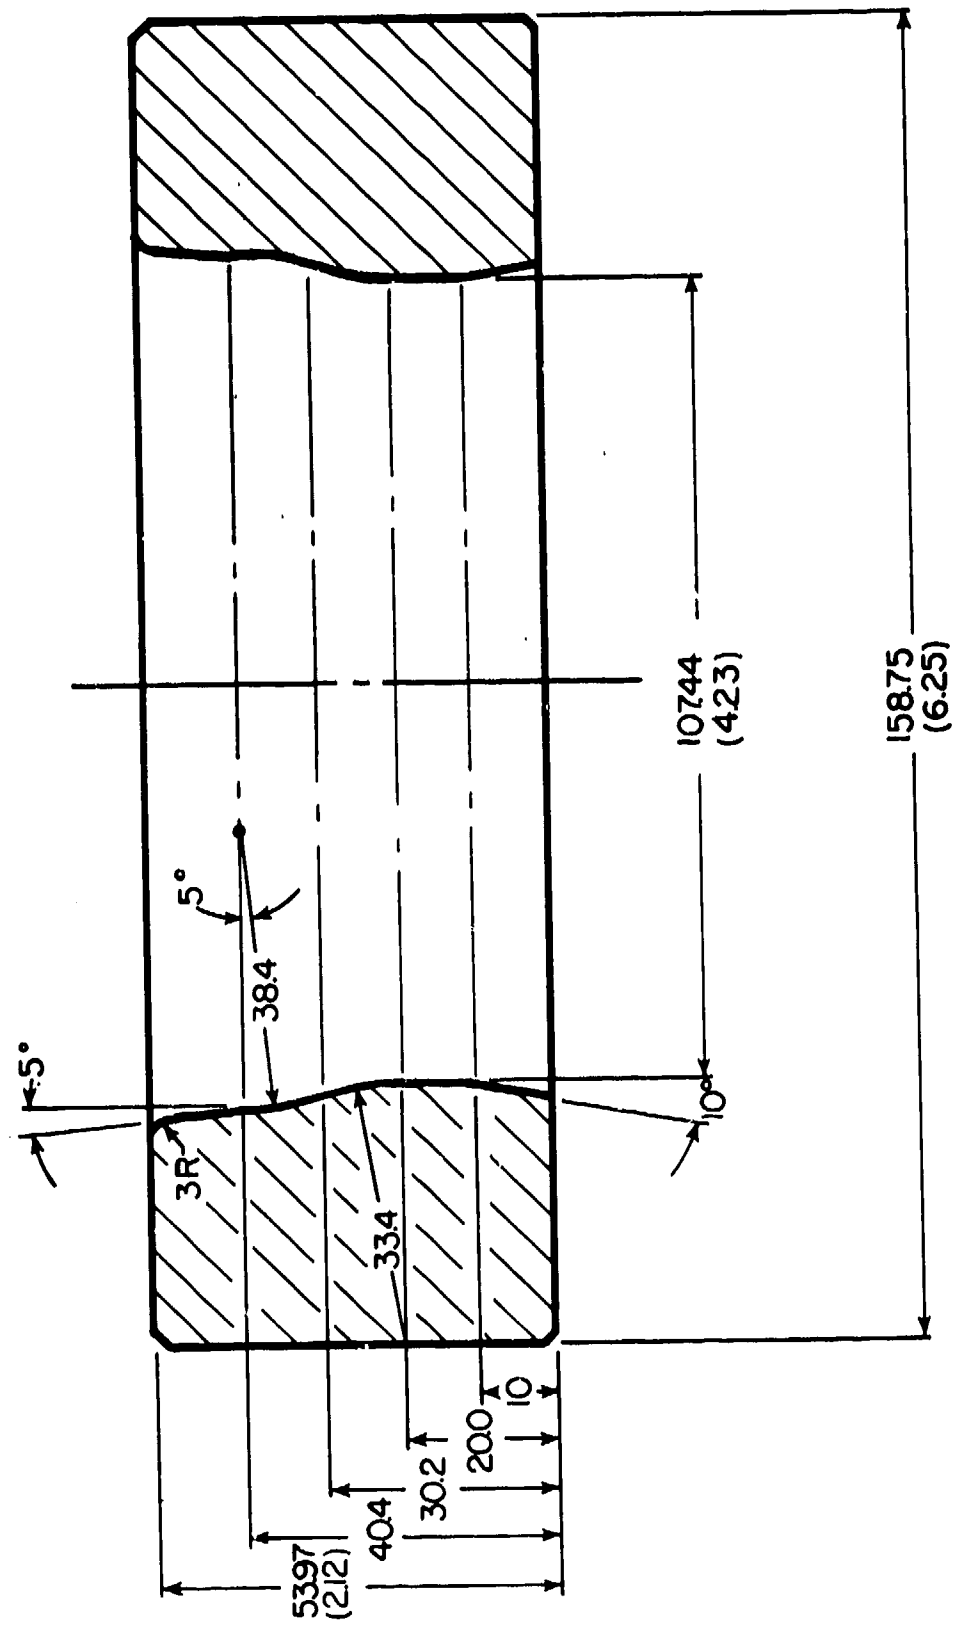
Double curvature profile for cold drawing of M335 shell (combined first and second draw - final double draw).
